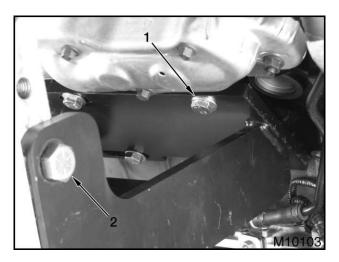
Mounting bolts for Engine Stand Mounting Bracket
